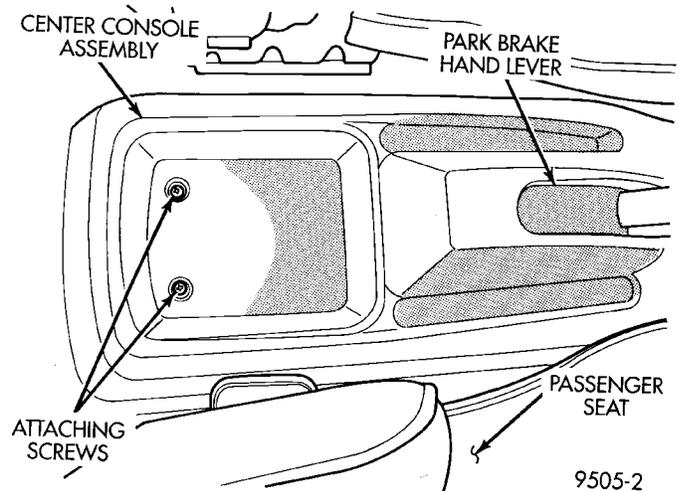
Center Console W/O Arm Rest Rear Attaching Screws
